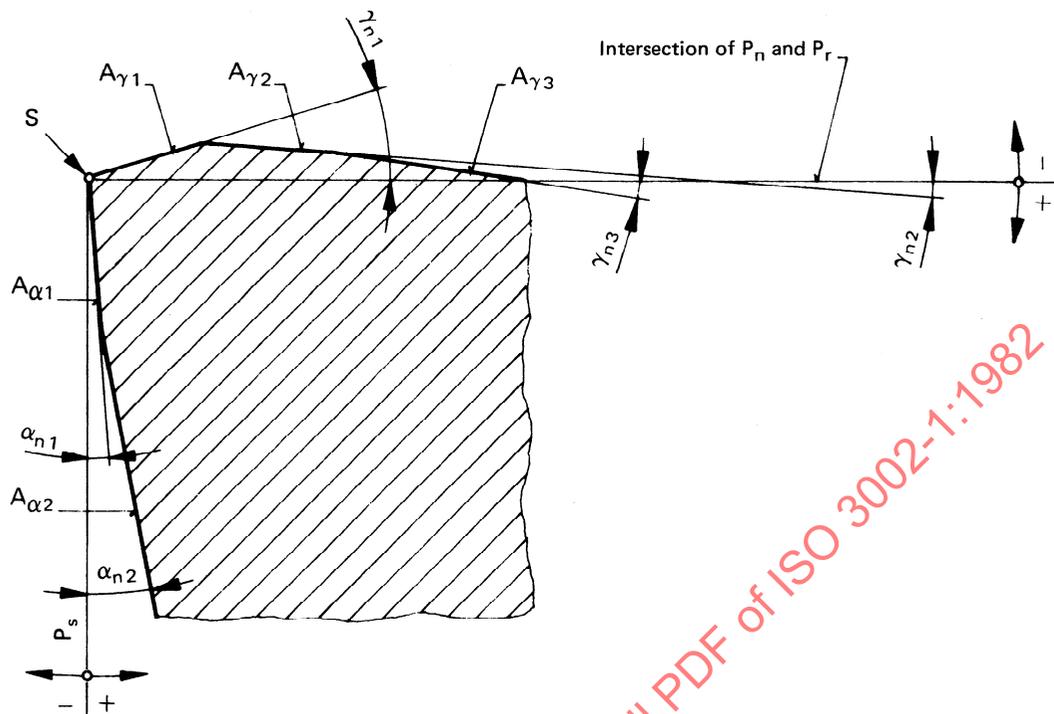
Tool normal rake and tool normal clearance angles on a wedge
